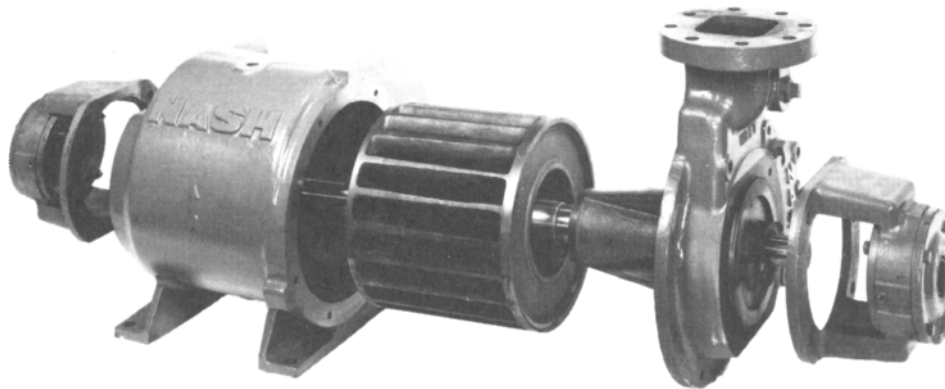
B. A partly disassembled Nash liquid ring compressor view shows the pump body, the rotor, the cone, and the separate bearing blocks. (Used by permission: Bul. 778-A2/89, p.5. ©Nash Engineering Co.)
